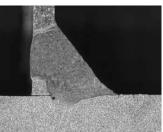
Weld test with 2mm offset corrected through feed forward correction from the clamping measurement system The complete system has been tested in a laboratory setup. The laboratory tests verified that the system performed as expected. It enables the measurement of individual parts offset during the clamping cycle to generate offset command to the welding robot before the welding operation starts. The corrected weld satisfies the quality requirement for automatic welding of the investigated and similar parts.
